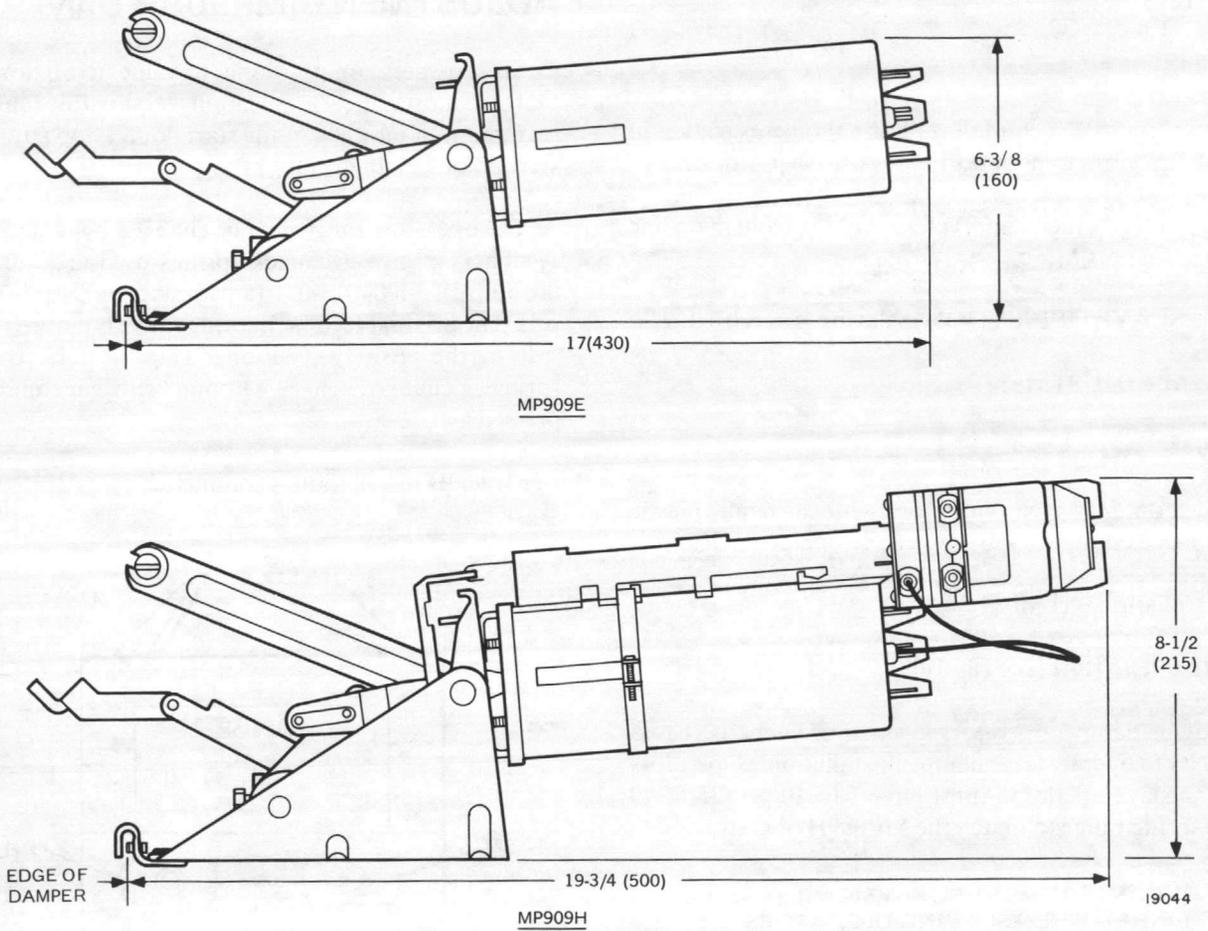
Internal Mounting Normally Open Dimensions in Inches (Millimeters).
